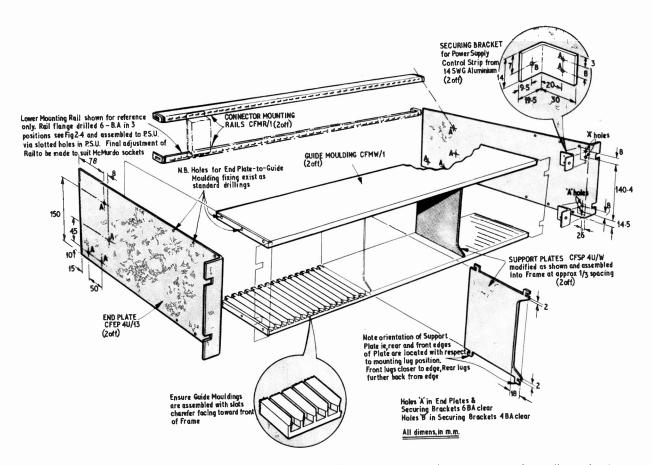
Perspective view of the Card Frame System 1. The end slots on the upper mounting rail require to be elongated for future adjustment of McMurdo sockets
